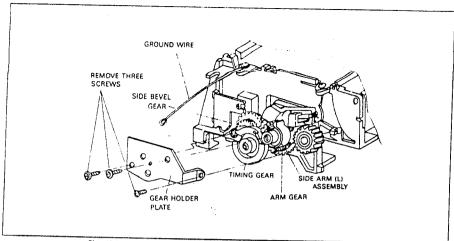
Timing Gear/Side Arm (L) Assembly/Side Bevel Gear Removal
